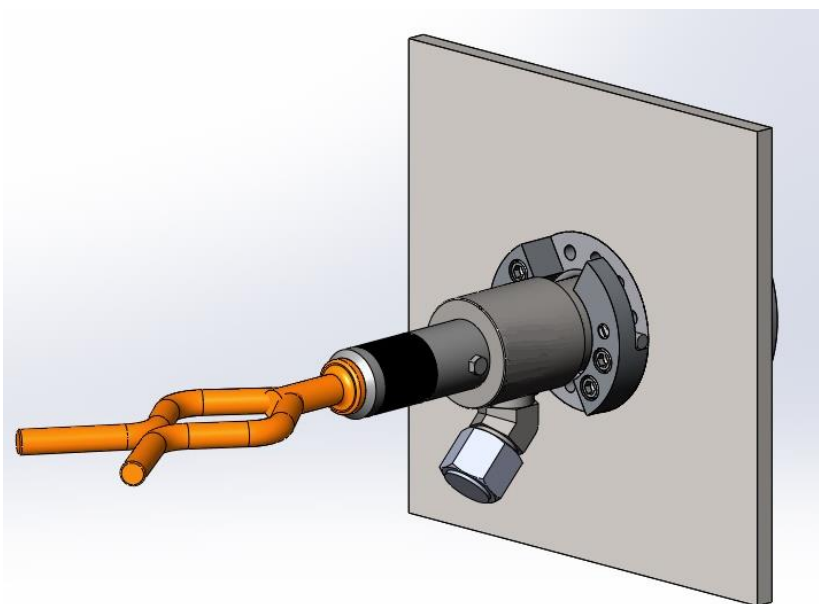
Typical Hot Stab with Locking Arrangement and Hydraulic Connection
